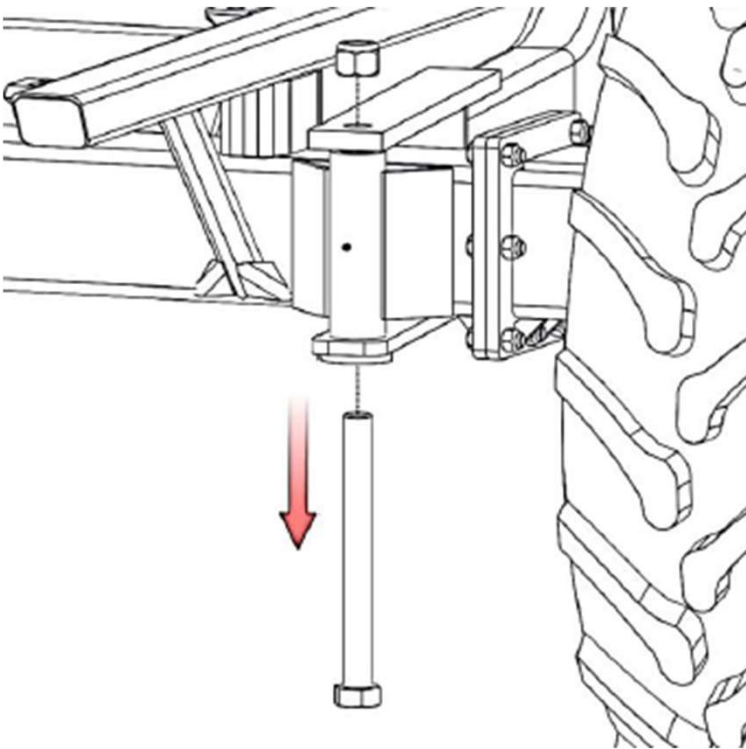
REMOVING OLD ARM BOLT/NUT (6 TON)
